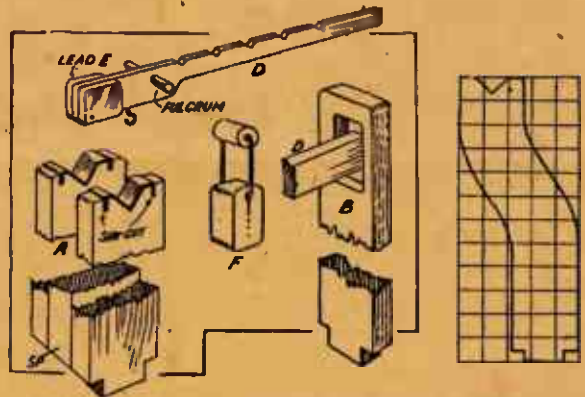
Detail of parts required Fig. 3—The pillar shape
